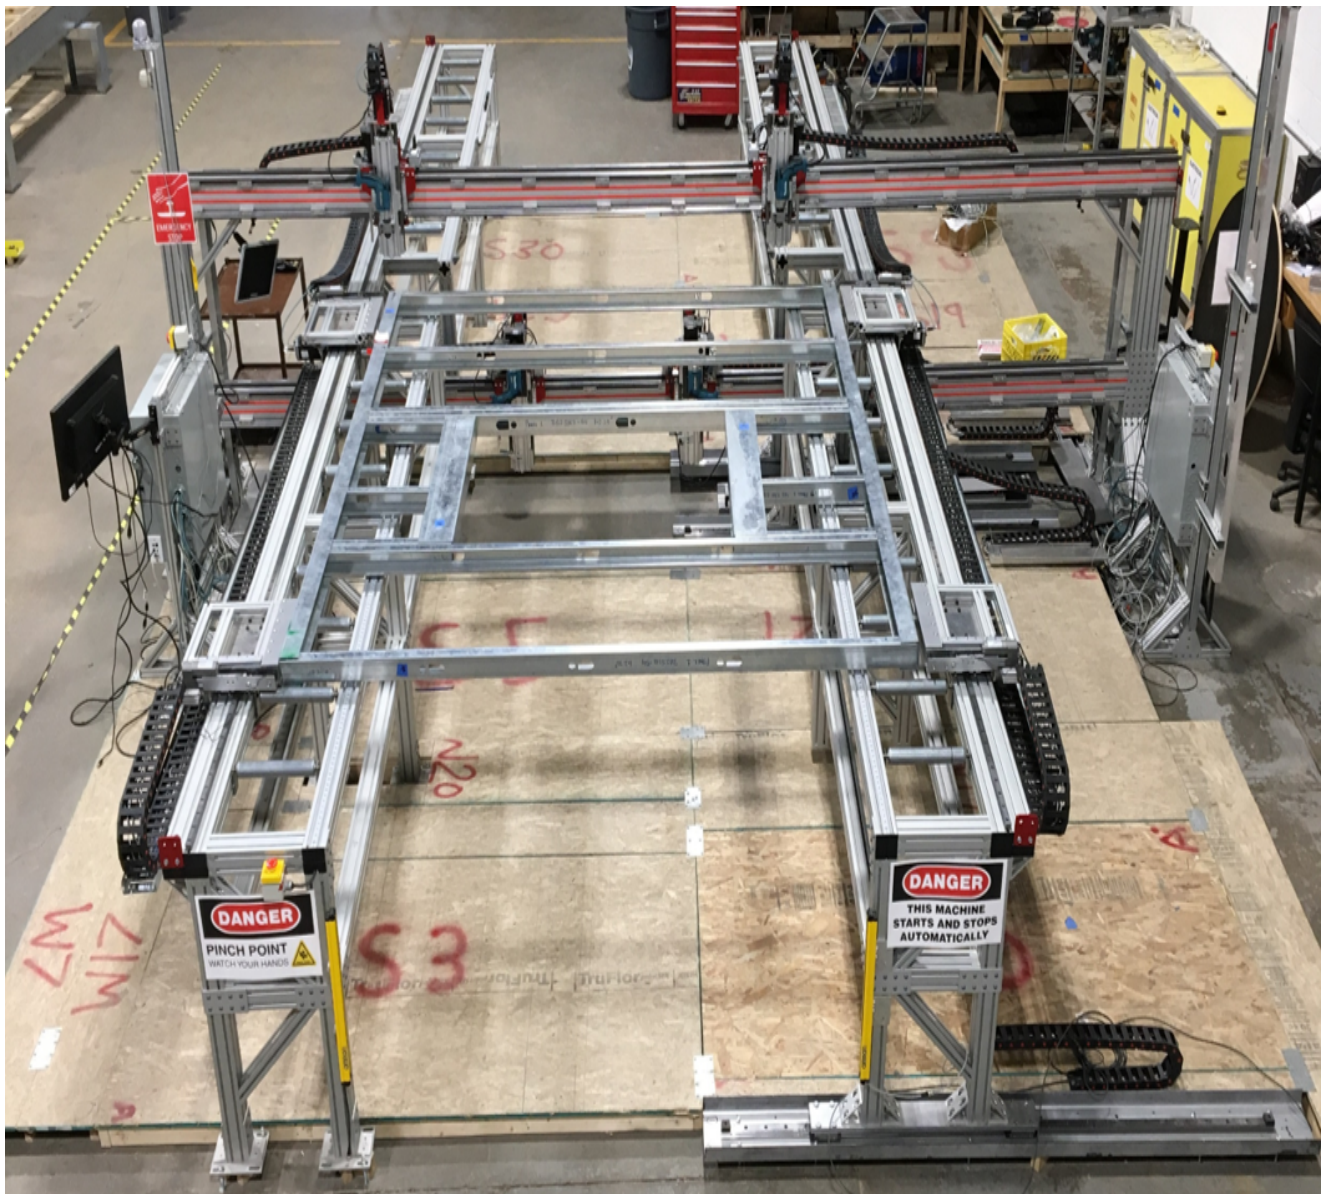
Realization of the automated steel wall framing machine discussed in sections 3 and 4.
